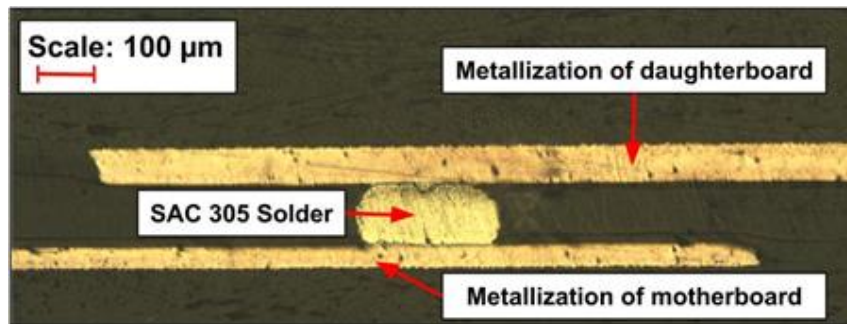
Cross-sectional morphology of solder joint on test vehicle showing parts of daughterboard, SAC305 solder, and motherboard.
